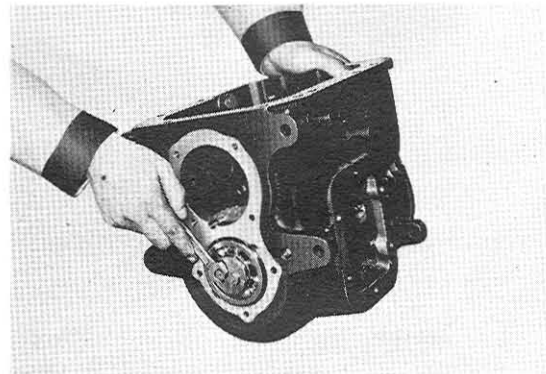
Removing Bearing V5069 Retaining Bolts
